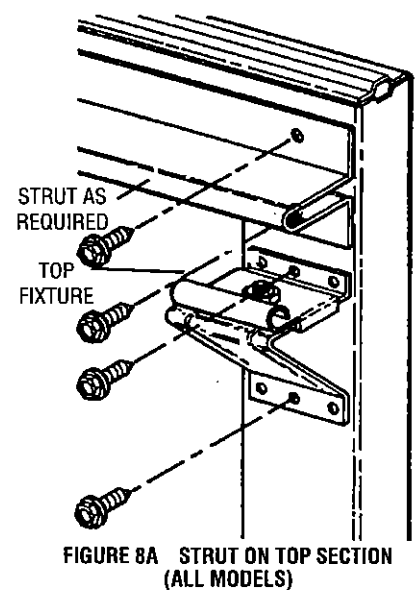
STRUT ON TOP SECTION (ALL MODELS)
